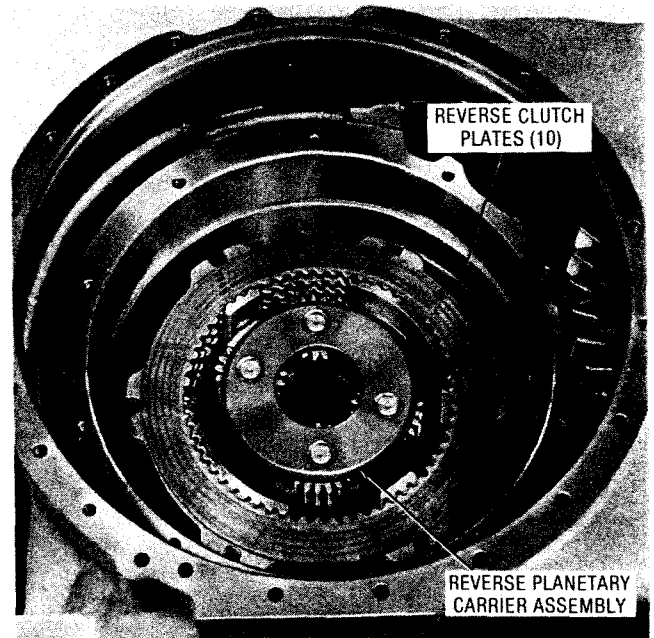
Reverse planetary carrier assembly and clutch plates
